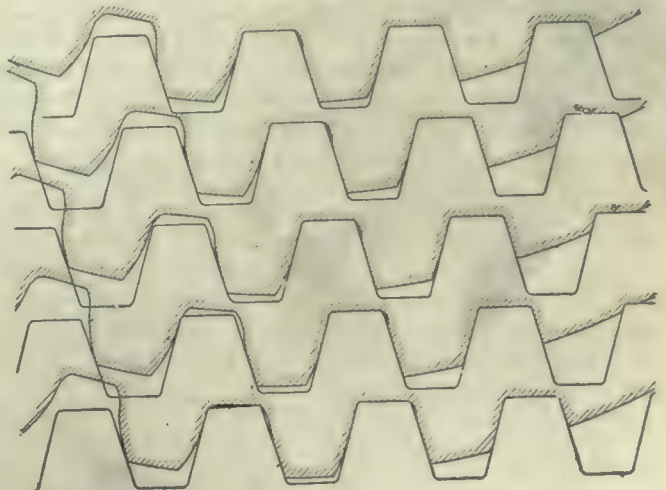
OUTLINE OF TOOTH FORM PRODUCED BY HOBGING
